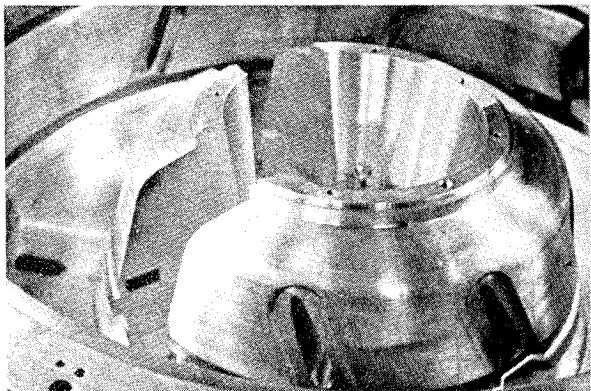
Wax pattern tooling; six inside o.d. ring die blocks in place.
